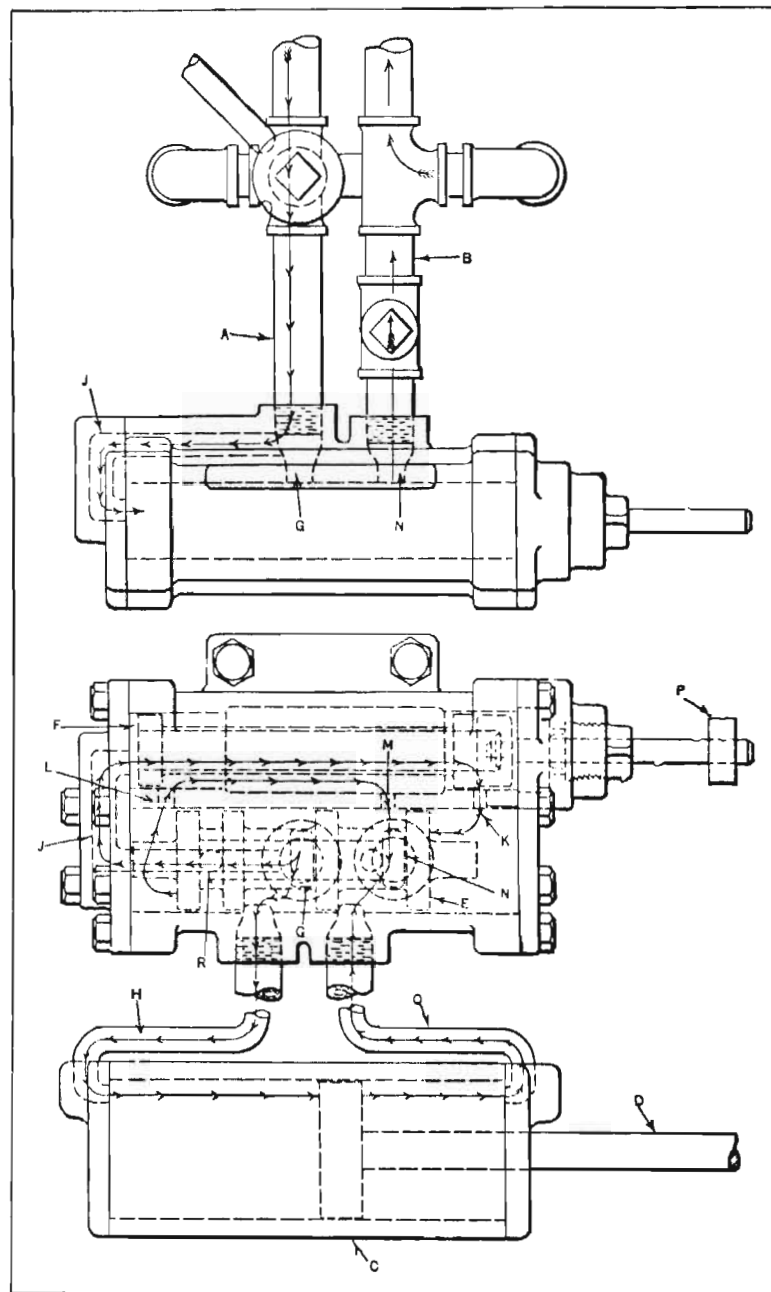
Hydraulically Operated Reciprocating Mechanism
